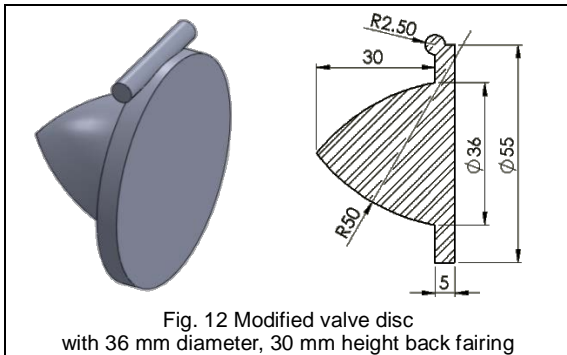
Modified valve disc with 36 mm diameter, 30 mm height back fairing
